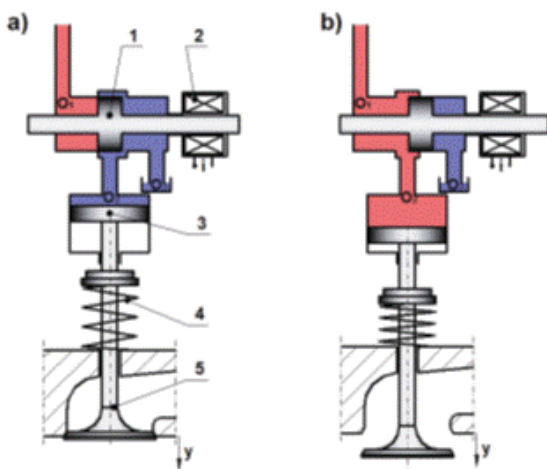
The diagram of single-acting hydraulic drive: 1 – slider of electrovalve, 2 – electromagnet coil, 3 – piston of the actuator, 4 – actuator piston spring (valve spring), 5 – valve, O_1 , O_2 , O_3 – oil channels
